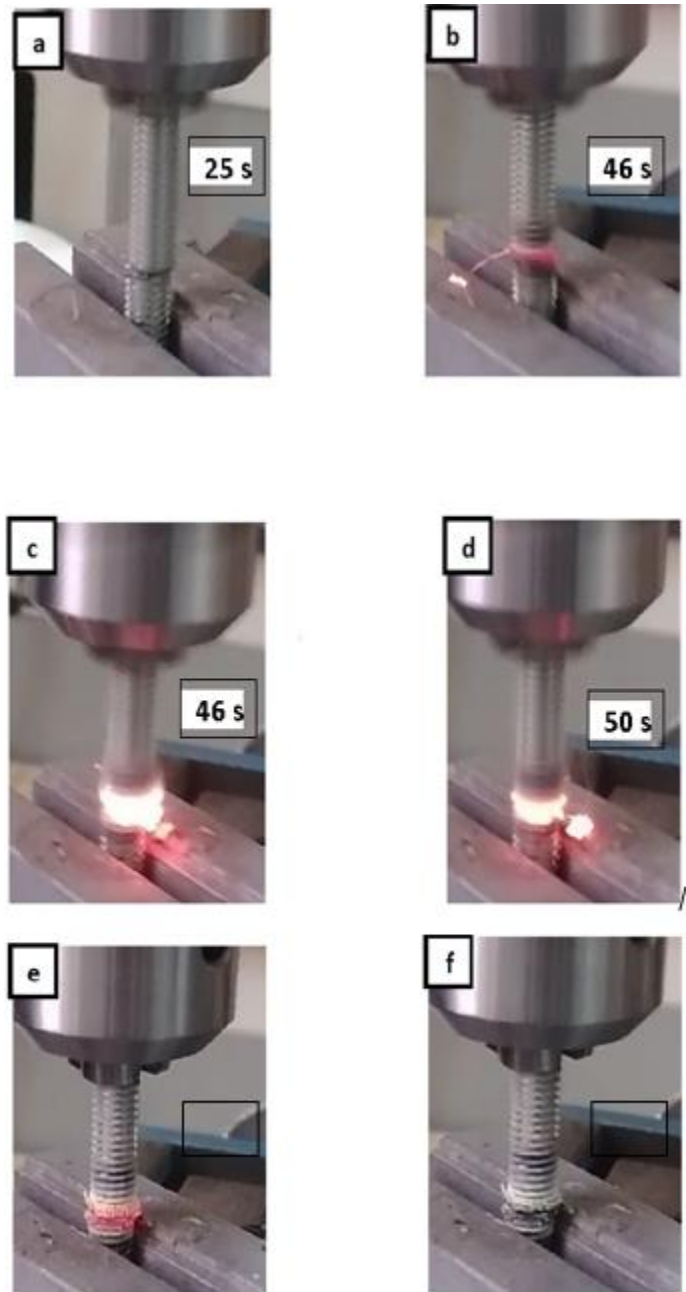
Schematic representation of rotary friction welding process.
